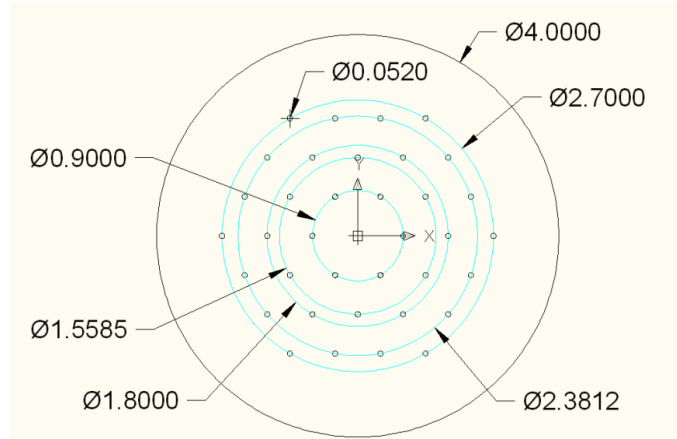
CAD drawing of distributor plate used for CarboHSP. $N_{or} = 34$. Dimensions in inches
